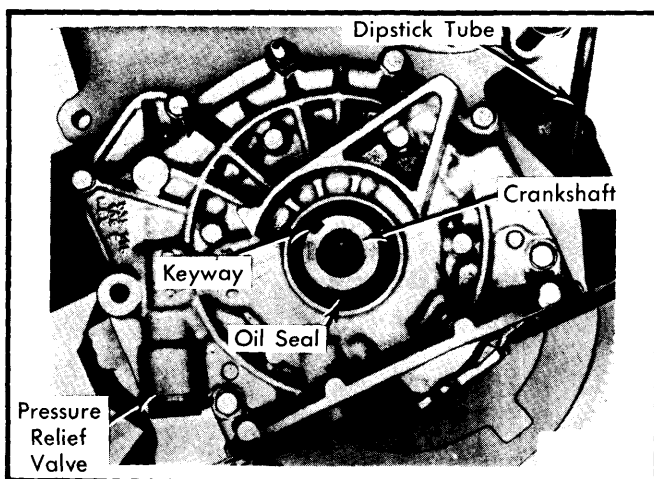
Engine Oil Pump with Crankshaft Oil Seal
